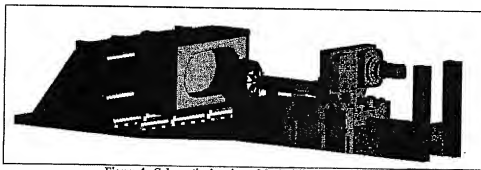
Schematic drawing of the Drilling Test Fixture (DTF).
